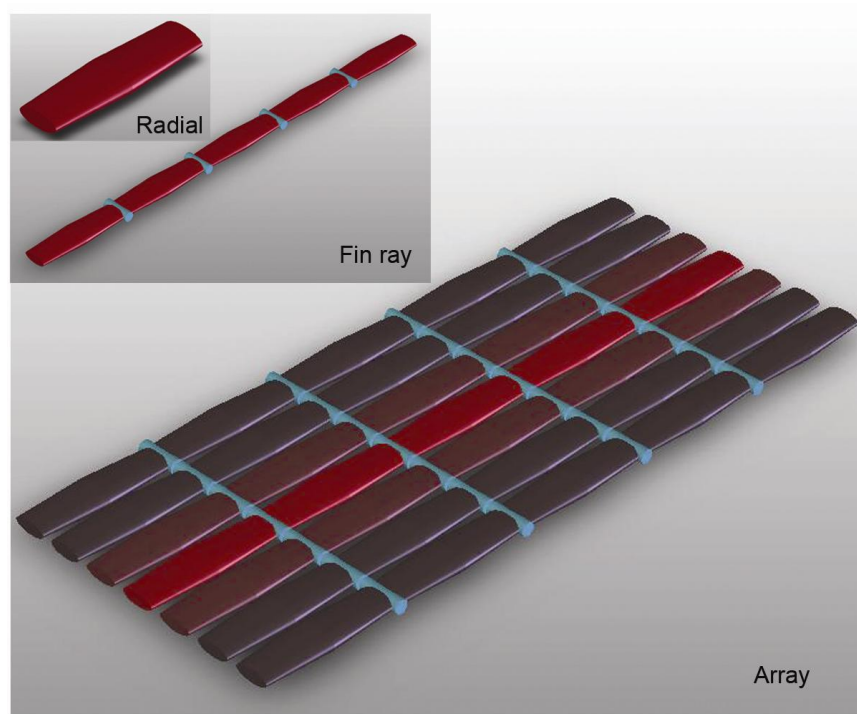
Exploded view and assembly of a simple robot design mimicking a stingray [1].
